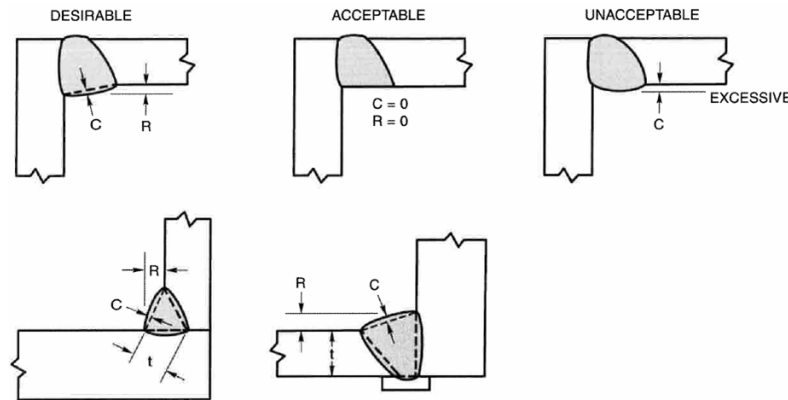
Requirements of groove weld profiles in corner joints (AWS 2010)
